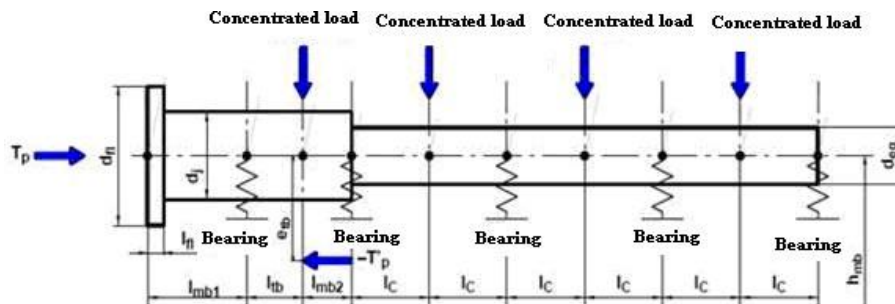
Model for Diesel Engine Crankshaft Alignment
